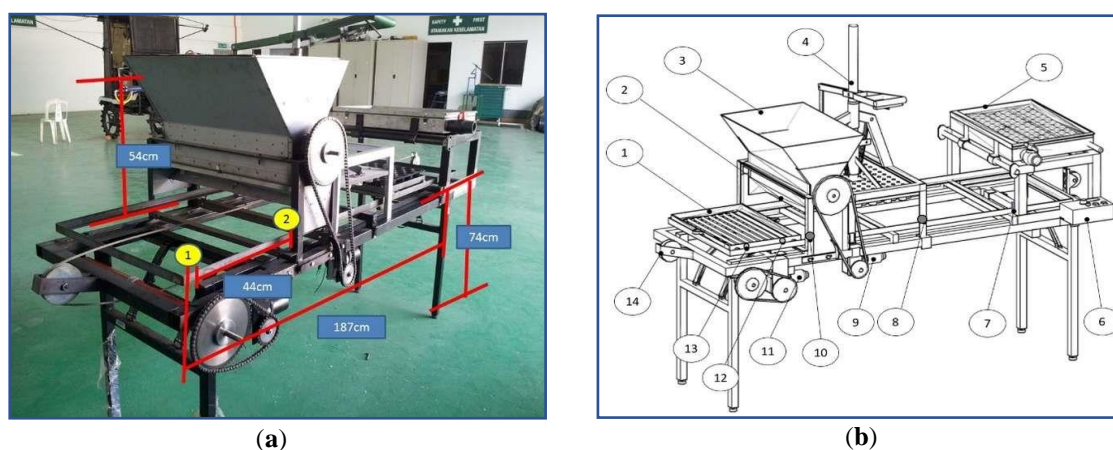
Soil dispensing machine: (a) Photographic view; (b) Isometric view.
